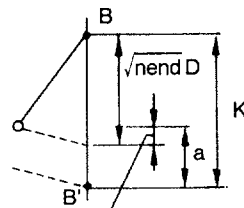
Depth of Cut in the 1st Thread Cutting Pass when “ $\sqrt{n_{end} D} \neq (K - a)$ ”
